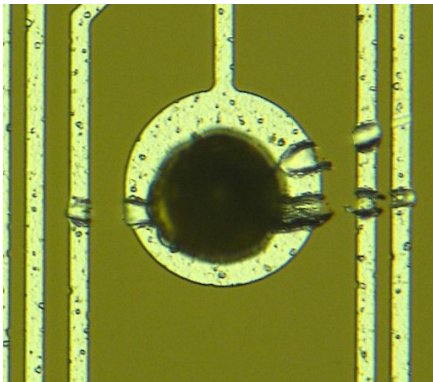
Damaged aluminum caused by a touching gold wire due to a bumping machine malfunction.
